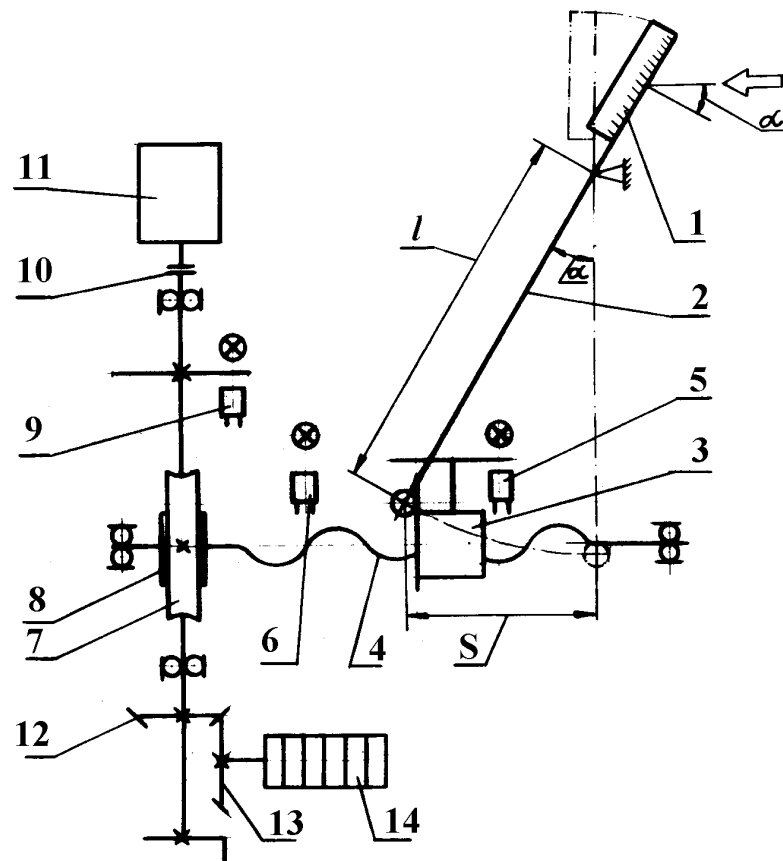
Drawing of the sinus mechanism of diffraction grating drive.
